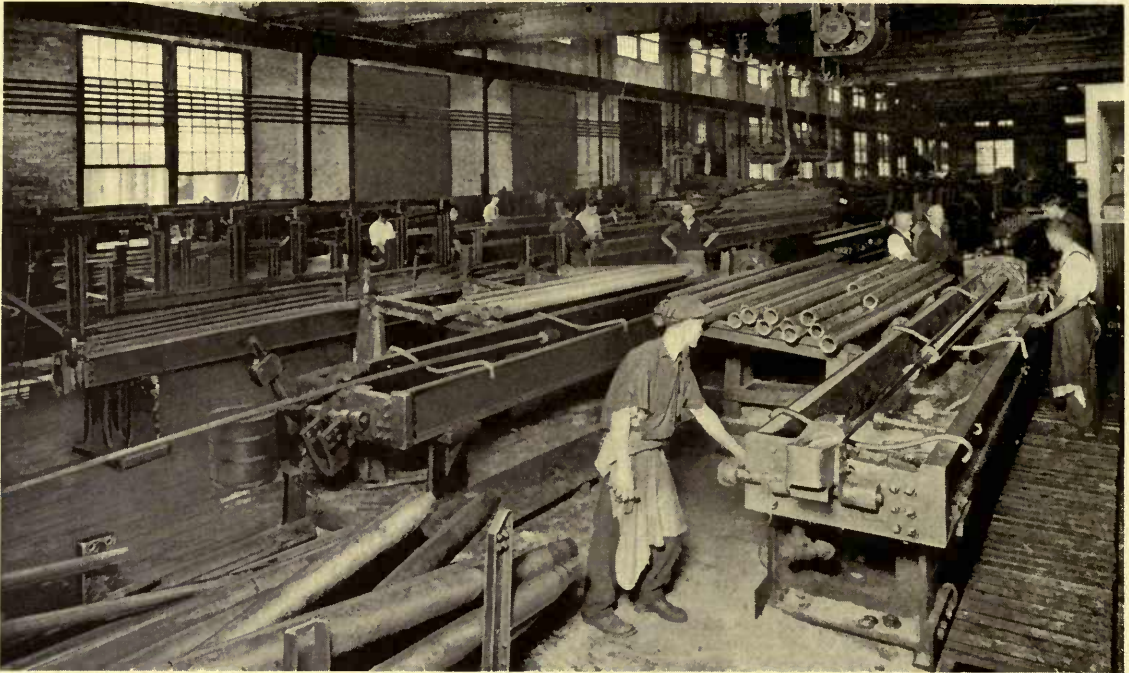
Drawing pipe. At the right a pipe is seen partially through the die. The inside dimensions and the shape of the pipe are maintained by a tapered plug held in the mouth of the die by the rod seen extending from the end of the pipe. It is supported near the end of the pipe by a bushing. The power for drawing is supplied by a long piston working in a cylinder. As soon as a batch of pipe has been passed through the draw bench, it is picked up by a crane and deposited in the annealing department.
